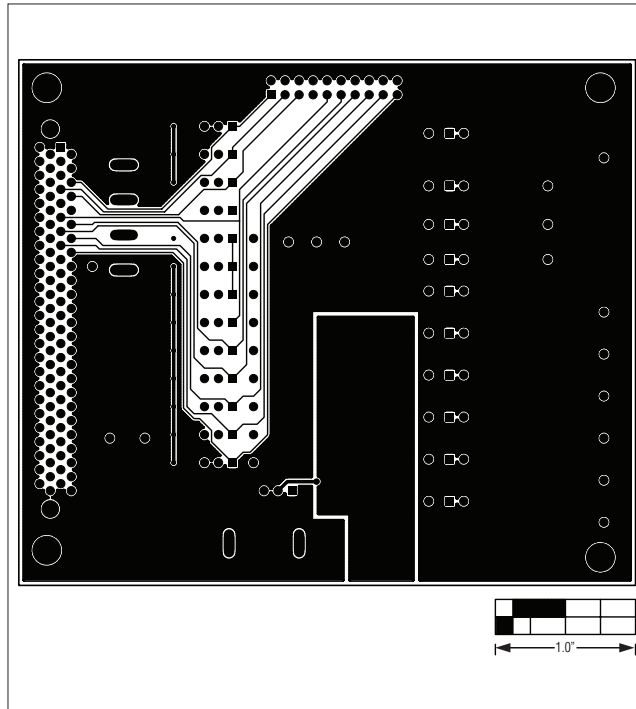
MAX17119 EV Kit PCB Layout—Solder Side
